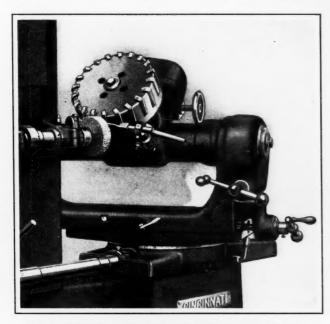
Manner in which the Milling Cutter is tilted for grinding Angular Surfaces on the Corner of the Blades
